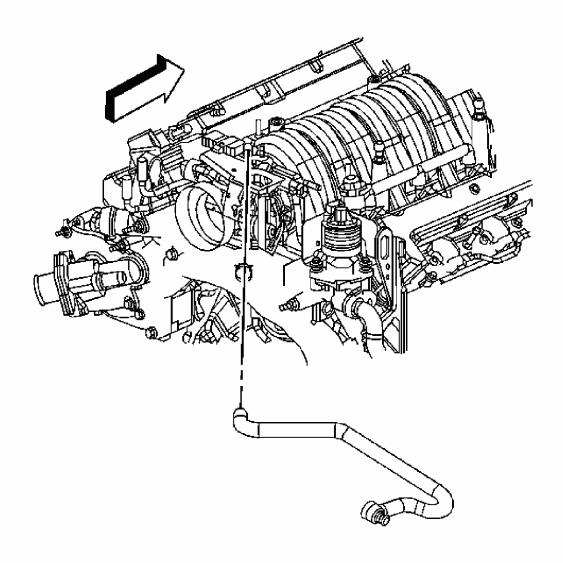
View Of Coolant Crossover Pipe Courtesy of GENERAL MOTORS CORP.
